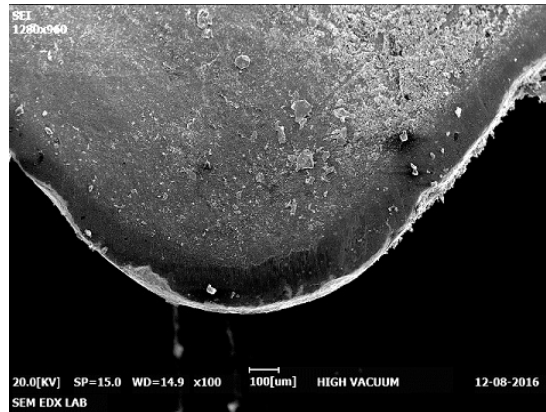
SEM Views of worn out inserts under wet condition with cutting length of 90 mm and machining duration 5 min (cutting speed-70.37 m/min and feed-0.150 mm/tooth)
